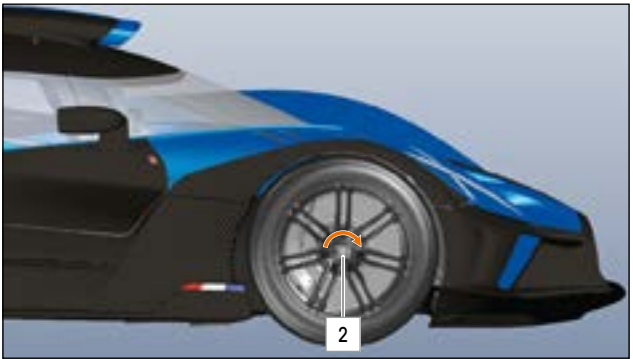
TIGHTENING DIRECTION ON THE PASSENGER SIDE
